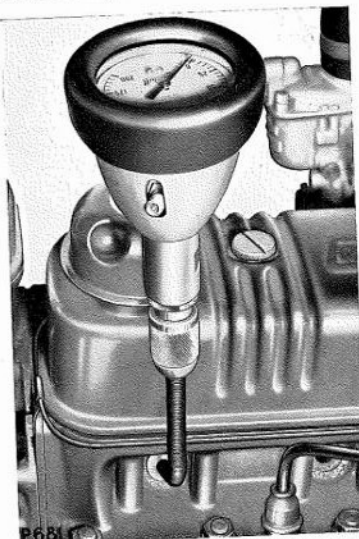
Checking engine compression pressures, using the Churchill Tool 430
